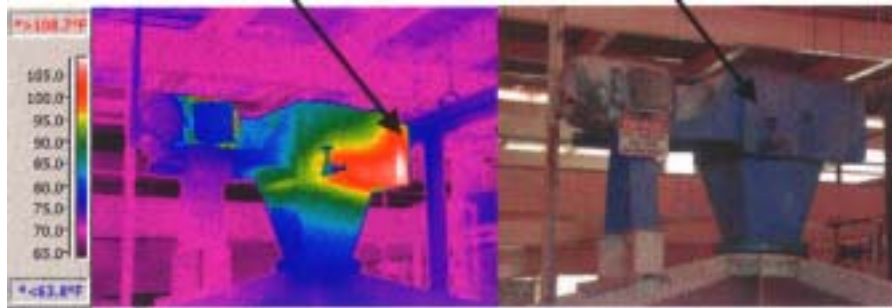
Possible gearbox problem indicated by white area defined by arrow. Design drawings of gearbox should be examined to define possible cause of elevated temperatures.
